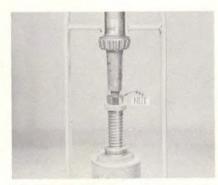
On Chrysler products and others with tapered roller bearings, push bearing off from bottom as shown. Keep nut on axle to protect threads when removing bearing.
